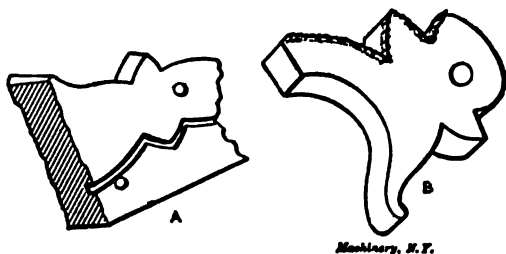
Arrangement of Fixture or Vise Jaw to Accommodate Burr
